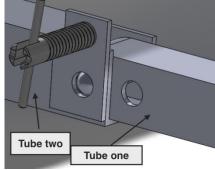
Flat metal piece with pull pin locking mechanism and hole for hinge spring ball nose joint
